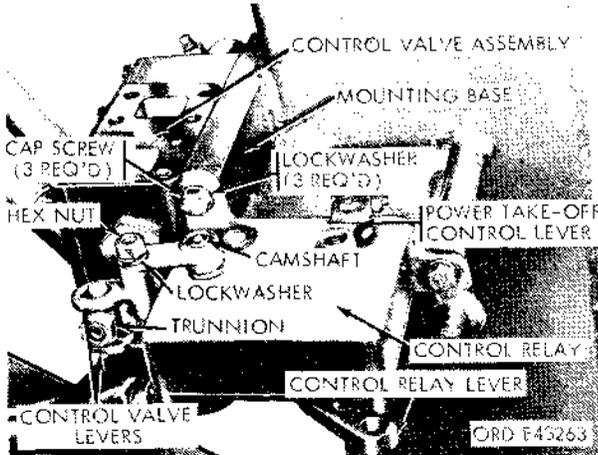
Bottom view of control valve assembly with pump and adapter removed.
